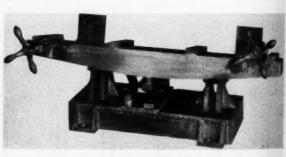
A heavy duty fixture made of sections of mild steel plate, welded together.
